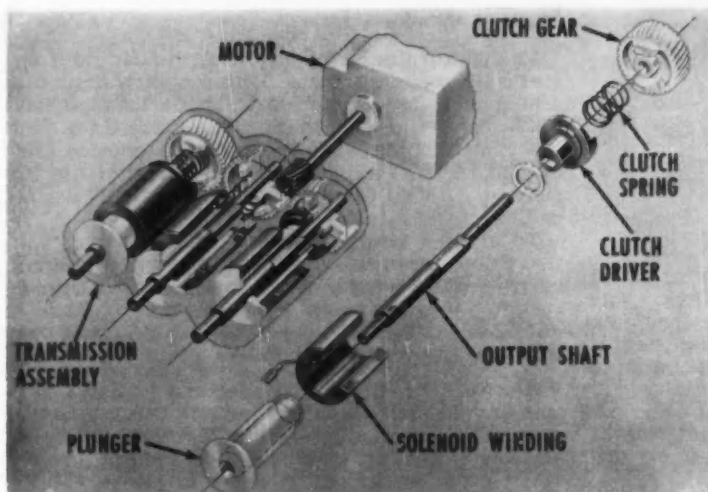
Power unit consisting of motor and solenoid gearbox of typical 6-way power seat adjuster.
